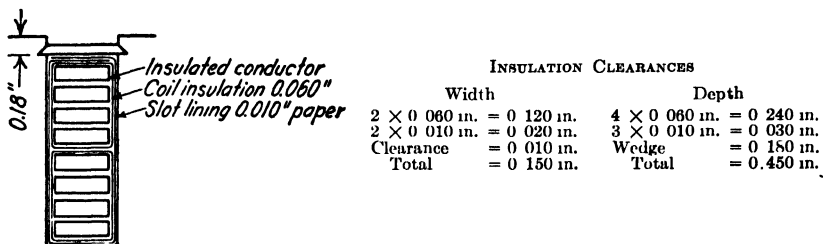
Thickness of coil insulation and slot clearances for a 2400-volt armature winding for 40-in. diameter or larger.
